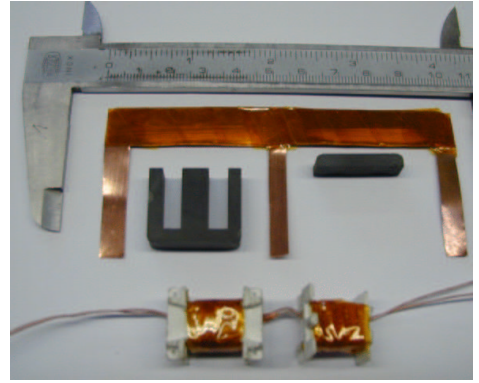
Pre-assembly view of solenoidal construction for the four-winding component.
